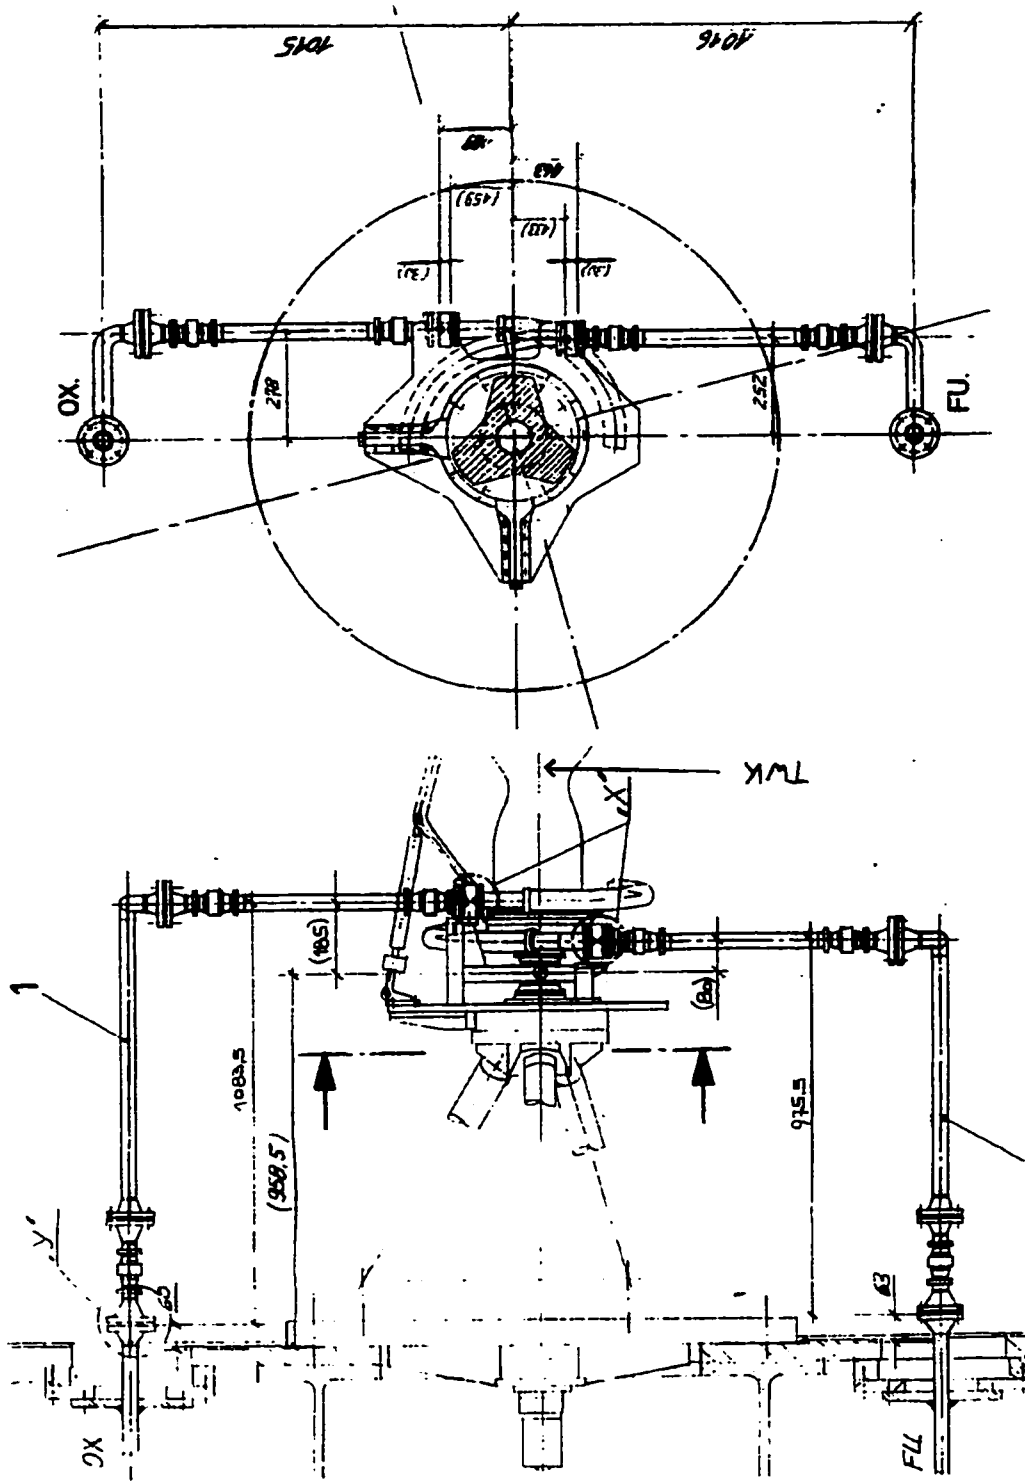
(cont'd): Rocket Engine Mounted in the Test Bed²⁵
